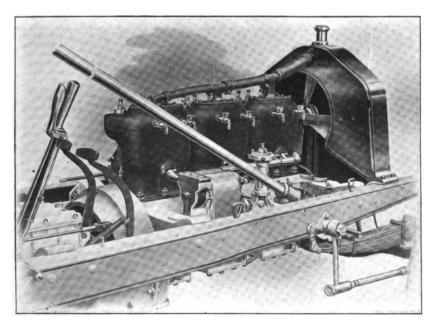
SHOWING RIGHT SIDE OF THE MORA MOTOR
